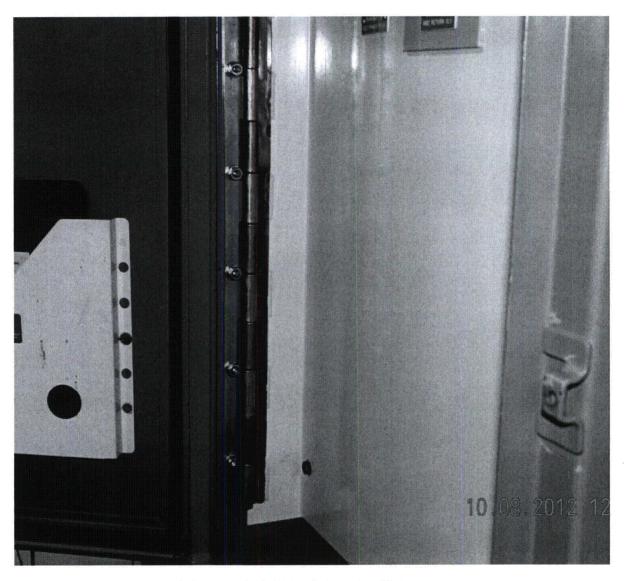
, Close-Up View of Hinge on Left Side of Mounting Plate
